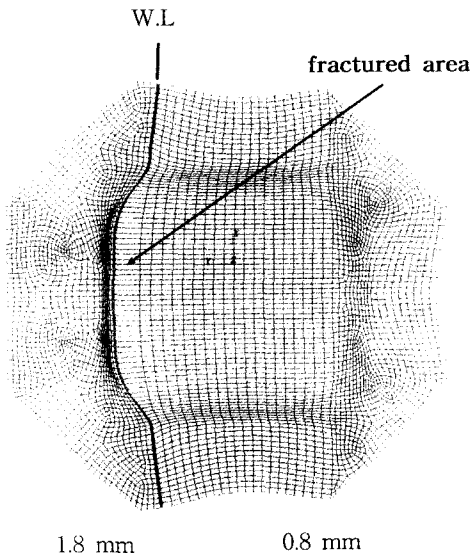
Deformed shape of T/B material in the rectangular cup drawing simulation with an initial shift of weld line($\delta=31$ mm) and an equal BHF of 49KN
